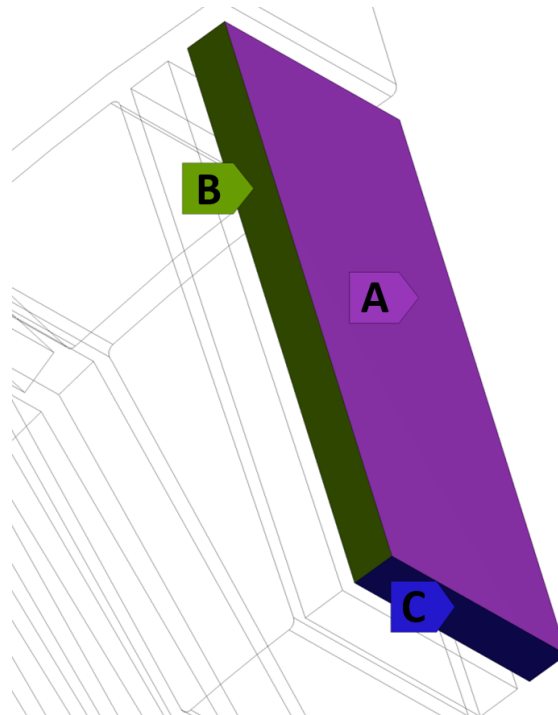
naming of the cable surfaces, DS11T coil block 4 pole turn inner layer
